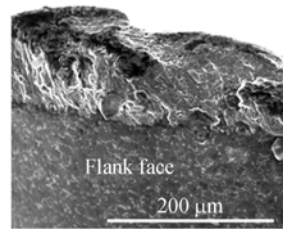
Micro cracks generated by  $\text{SiC}$  particle impact, cutting vibration and heat impact (milling for 60 min)
